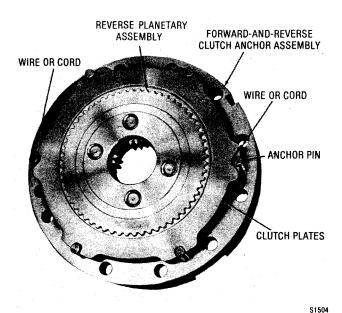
Reverse clutch plates and planetary wired in position on forward-and-reverse clutch anchor
